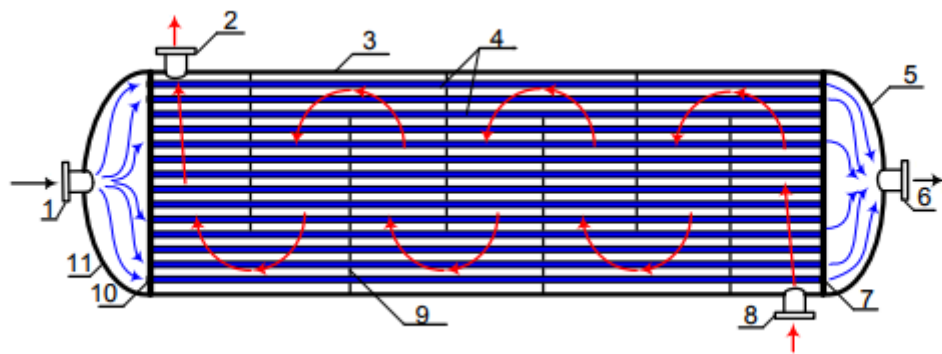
One-way shell-and-tube heat exchanger with partitions in the tube side: 1, 2, 6, 8 - fittings for input and output flows; 3 - a casing; 4 - pipe tube bundle, 5, 11 - to the rods; 7, 10 - tube sheets, 9 - partitions in the tube side [5, p. 103]
